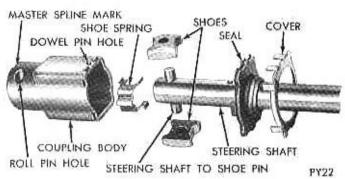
Steering Shaft "Pot" Coupling Disassembled
